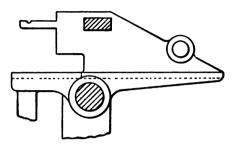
Grantype; mould-end jaw. Scale: half size.
